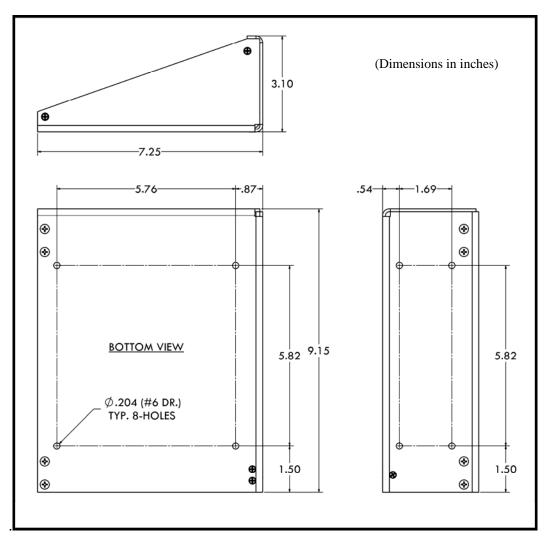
Processor Mounting Tray Hole Pattern for 60-2006 and 700-00187-000 and 700-00187-001 trays
